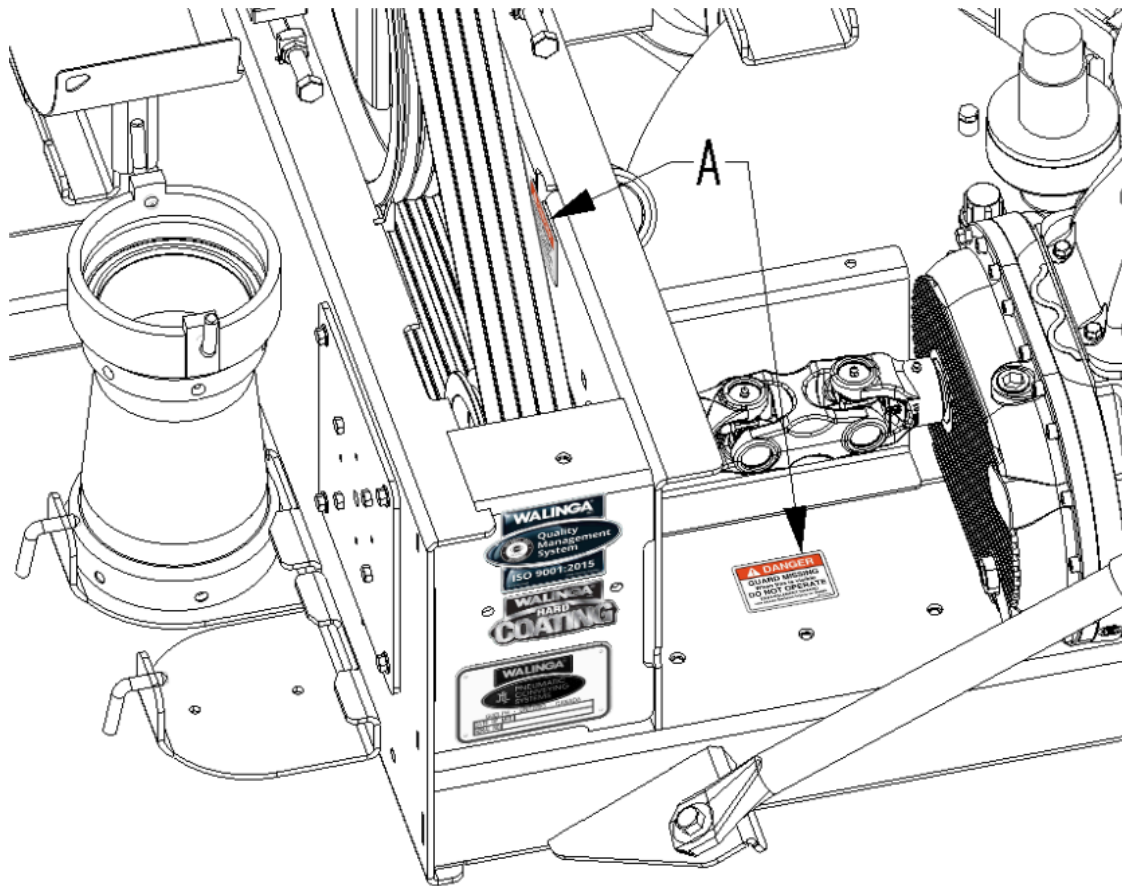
Front left of Agri-Vac with belt guard and blower drive shaft guard removed
